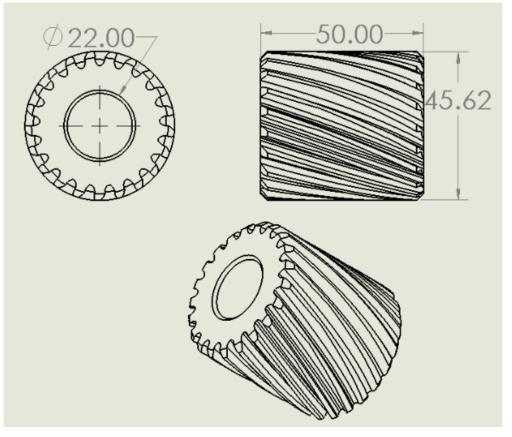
Revised Automatic string wrapping drawing dimensions in mm
